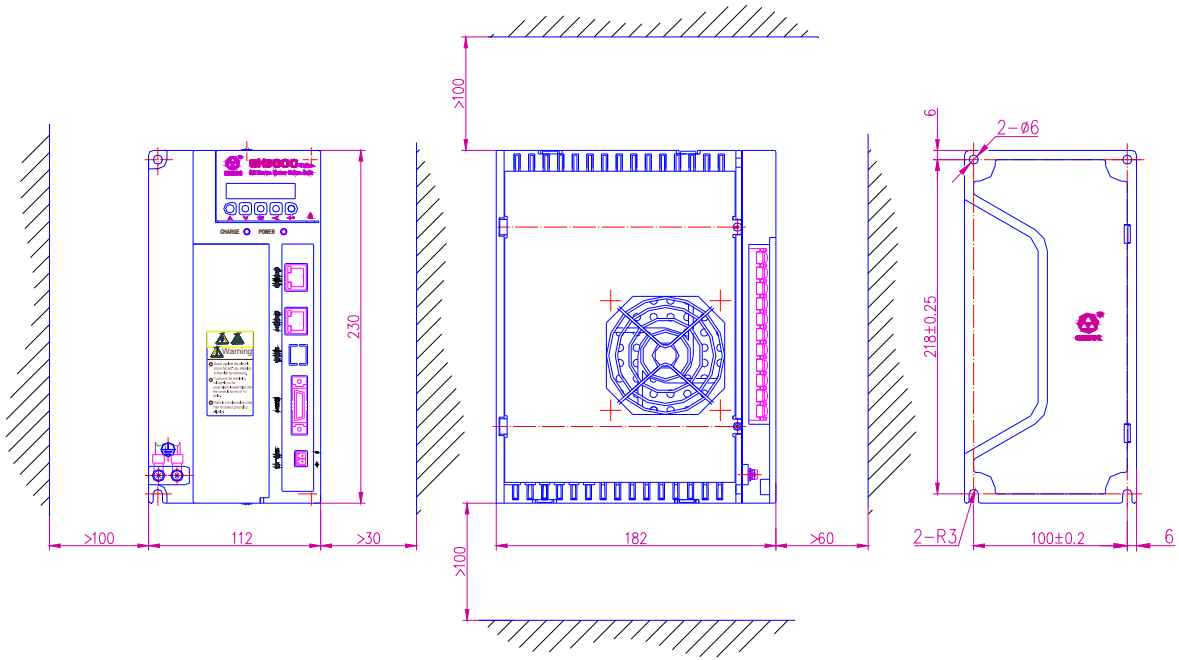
GH2050T, GH3048T installation dimension (Unit: mm)
